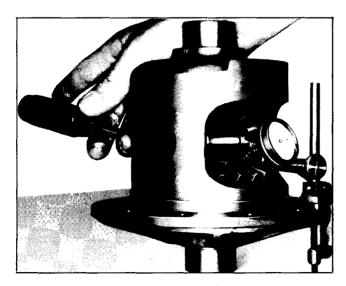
D-9 Checking Pinion to Side Gear Clearance - Clutch Pack Type
